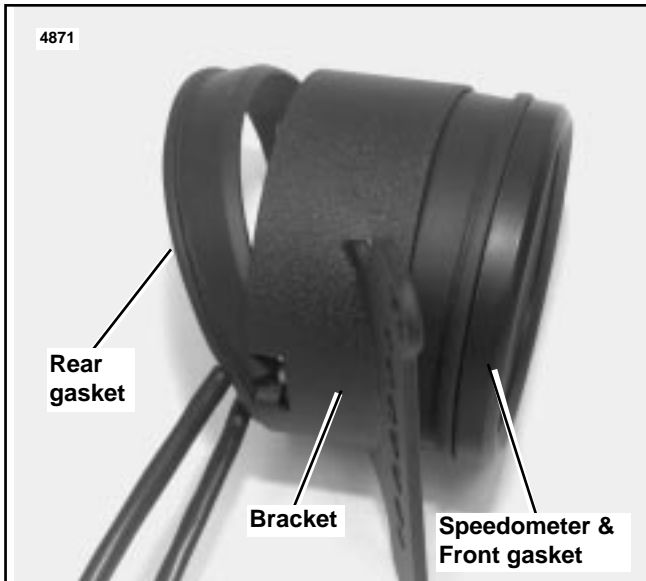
Speedometer and Gaskets in Single Instrument bracket
